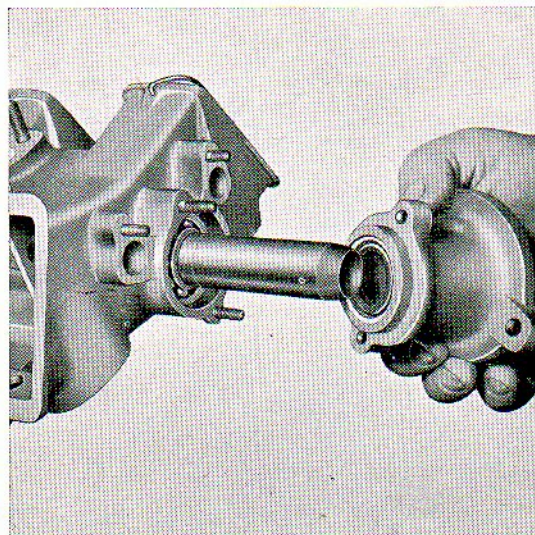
14/3 shows the whole procedure with the camshaft housing dismantled. This job can be done also without dismantling the camshaft housing.
